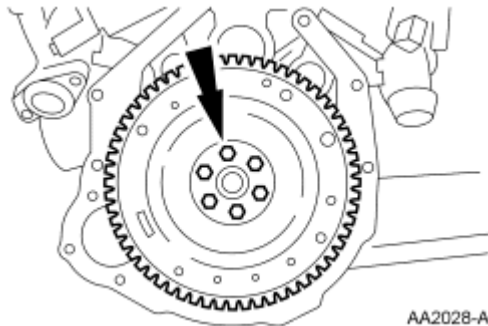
Locating Engine-To-Transmission Spacer Plate
